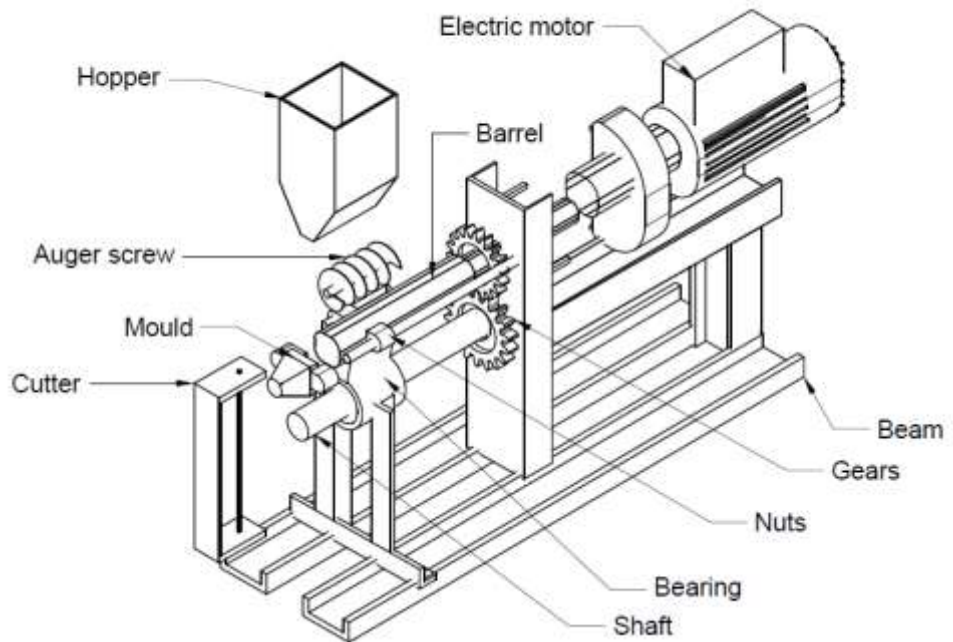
Exploded View of Groundnut Cake Moulding Machine
